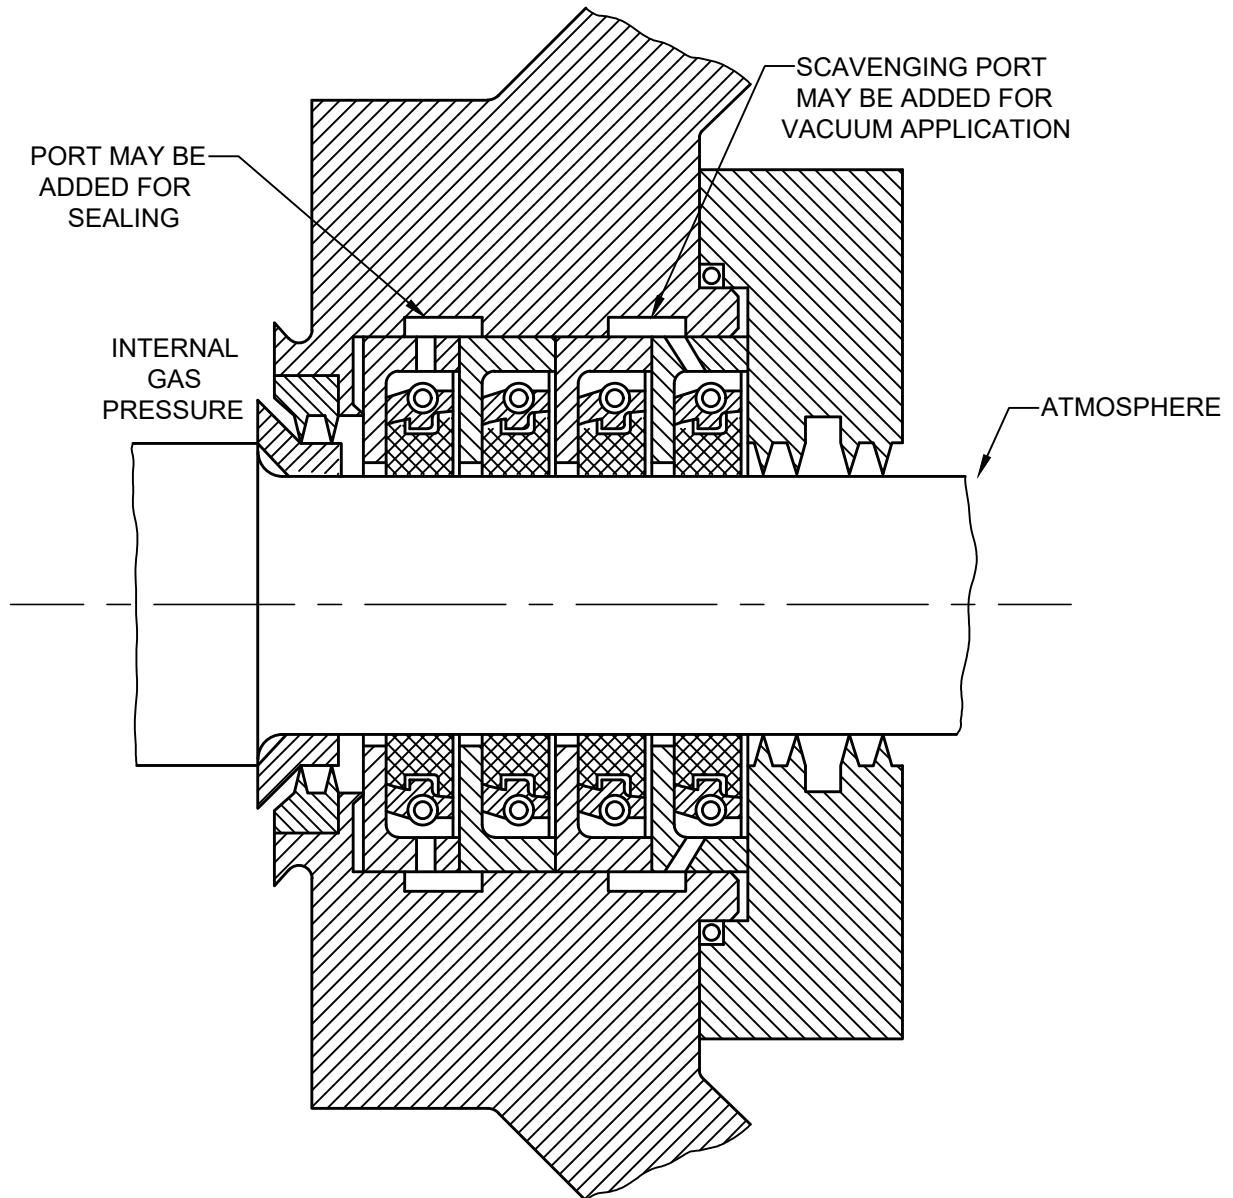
RESTRICTIVE - RING SHAFT SEAL
